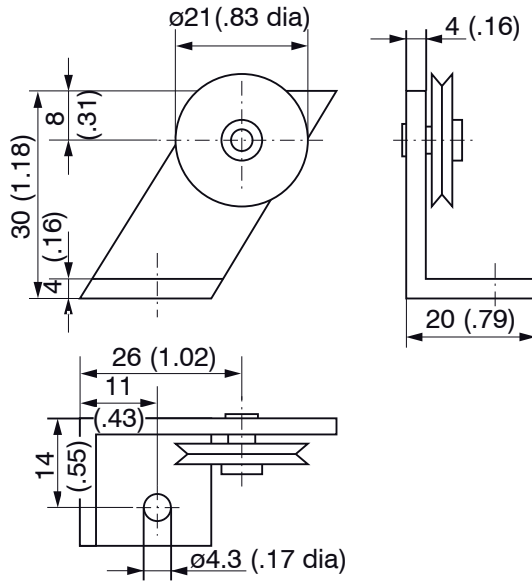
Guide pulley TR3-WDS fix with mounting socket, dimensions in mm (inches), not to scale
